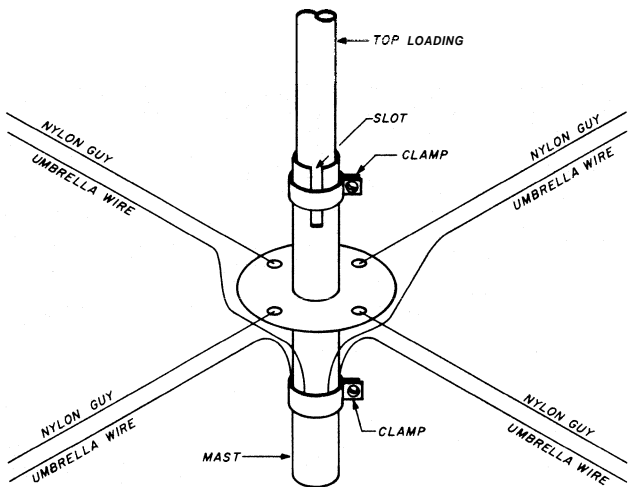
Detail showing attachment of top guys, "umbrella" wires and top loading whip.
